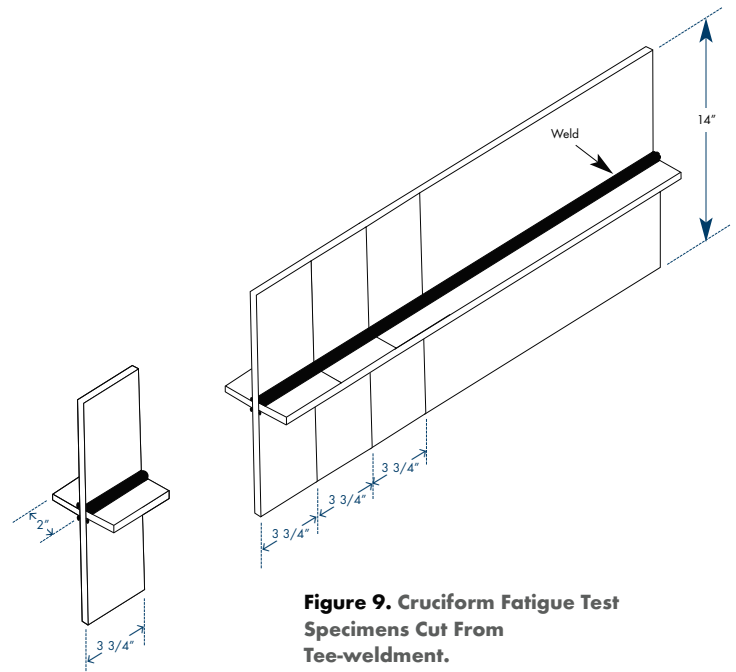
Cruciform Fatigue Test Specimens Cut From Tee-weldment.
